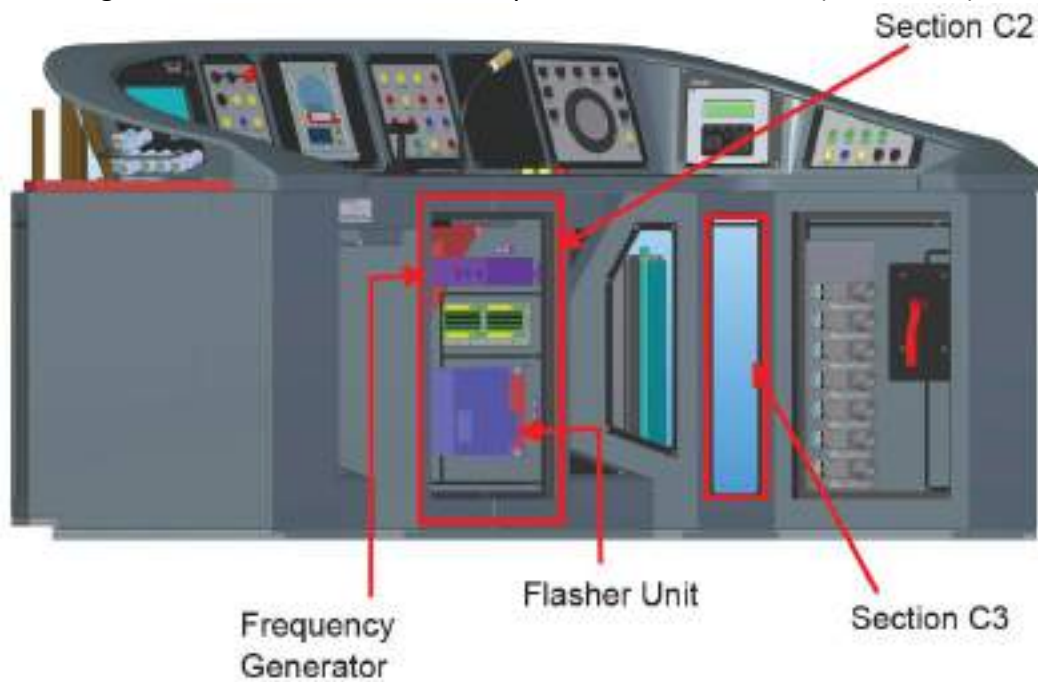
Front Bottom Internal side components of Driver Desk (Section-C2)
